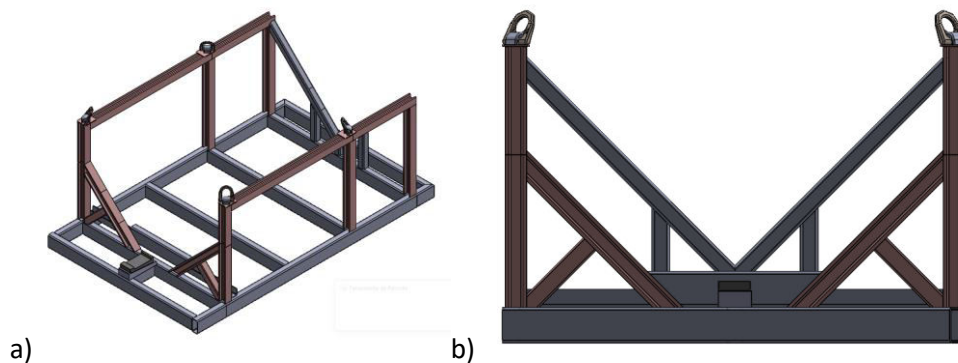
Fourth solution: Two connected points of support with high side parts for non-uniform shaft: isometric view (a), and front view (b).
